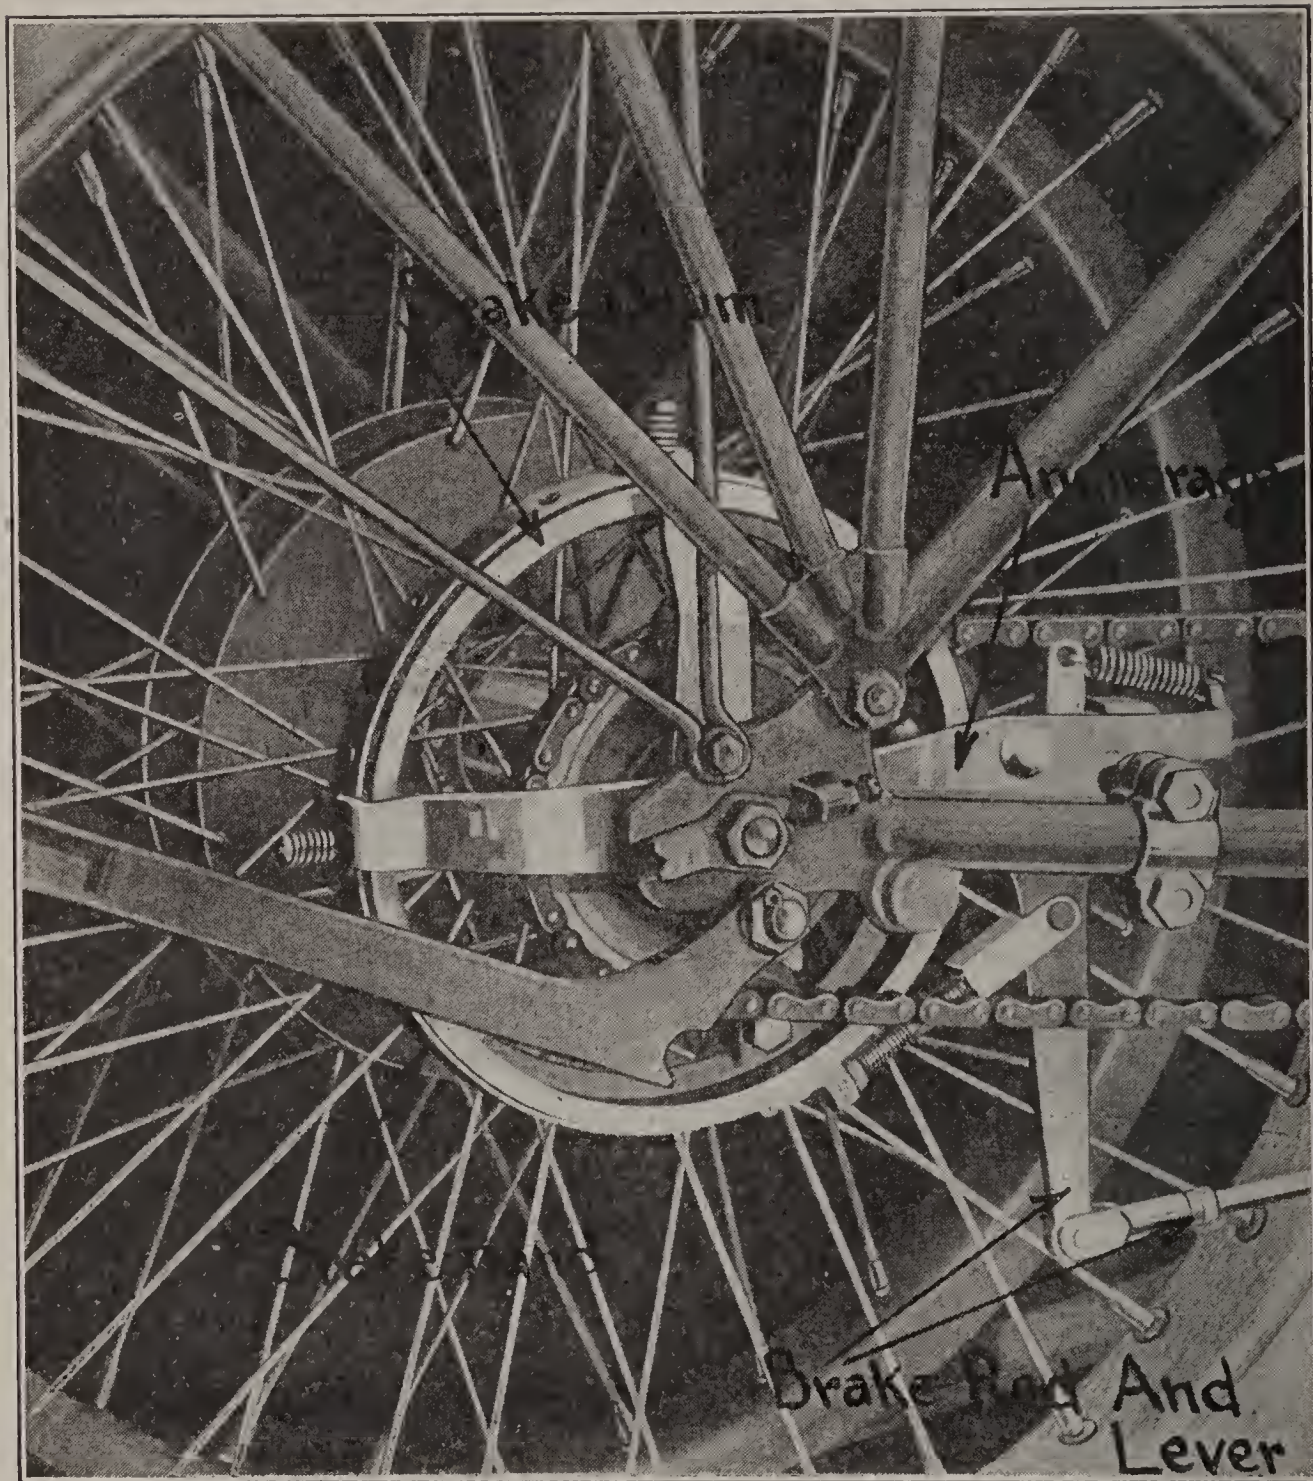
External Constricting Band Brake Used on Harley-Davidson Belt Drive Model.
